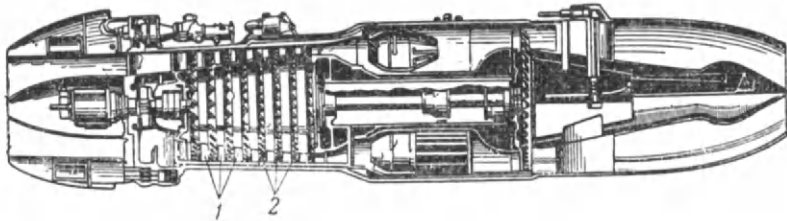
Turbojet motor with an axial compressor: 1, stator vanes; and 2, turbine wheel with buckets.
